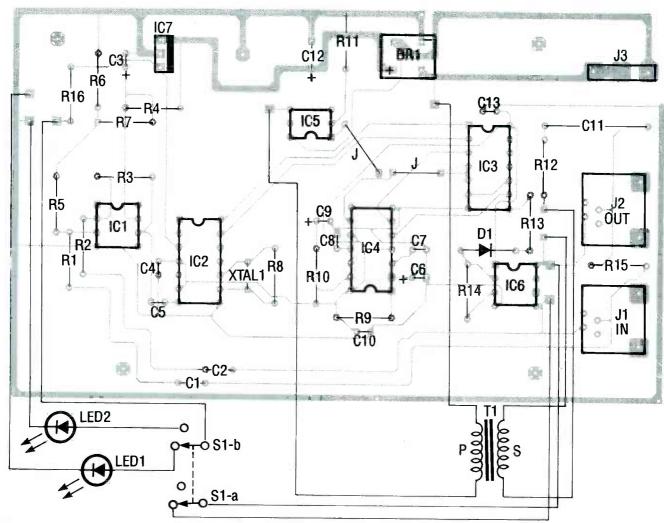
PARTS-PLACEMENT DIAGRAM. A similar layout can be used if you choose to use perfboard instead of a PC board.
